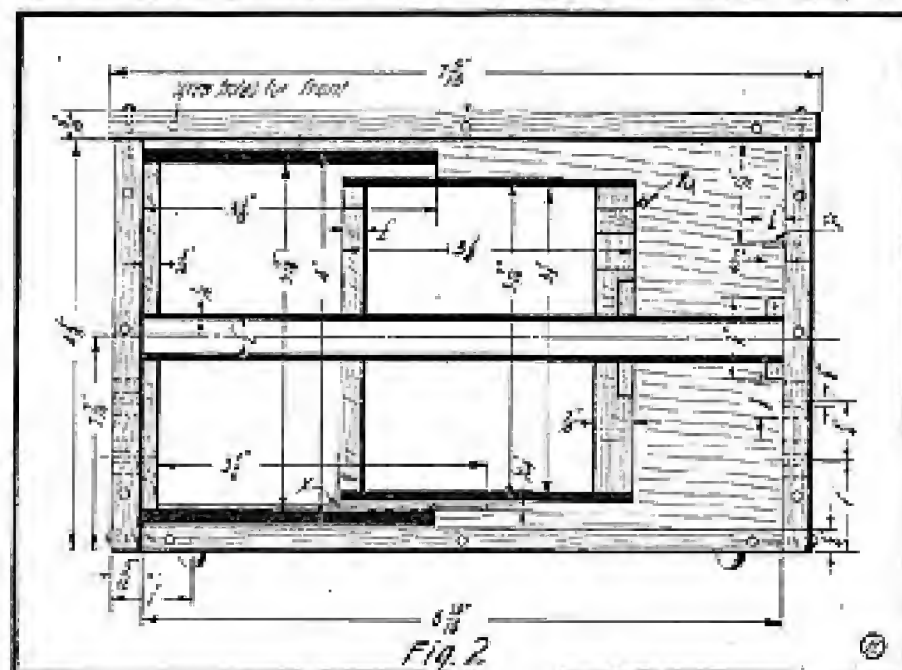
Side View Sectional View of Coupler, Showing Primary and Secondary Coils.
